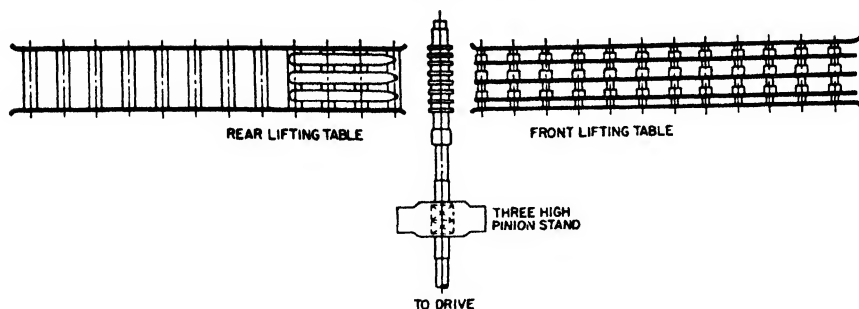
Schematic layout for a three-high billet mill, using the rolls shown mounted in their housings in Figure 25-21.
